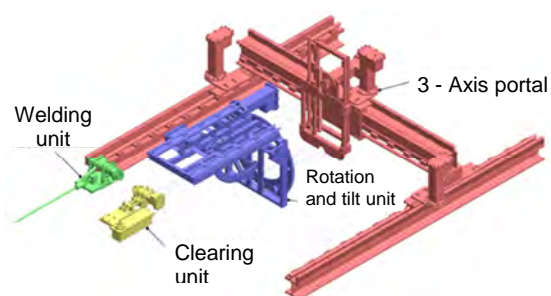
Multi-axis welding machine components made from stainless steel
